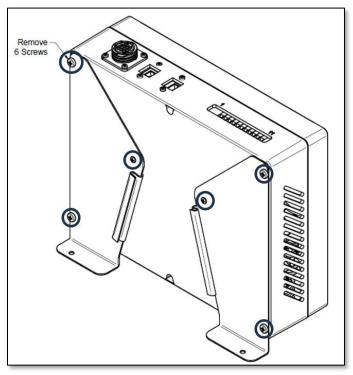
CONTROL PANEL MOUNT REMOVAL
